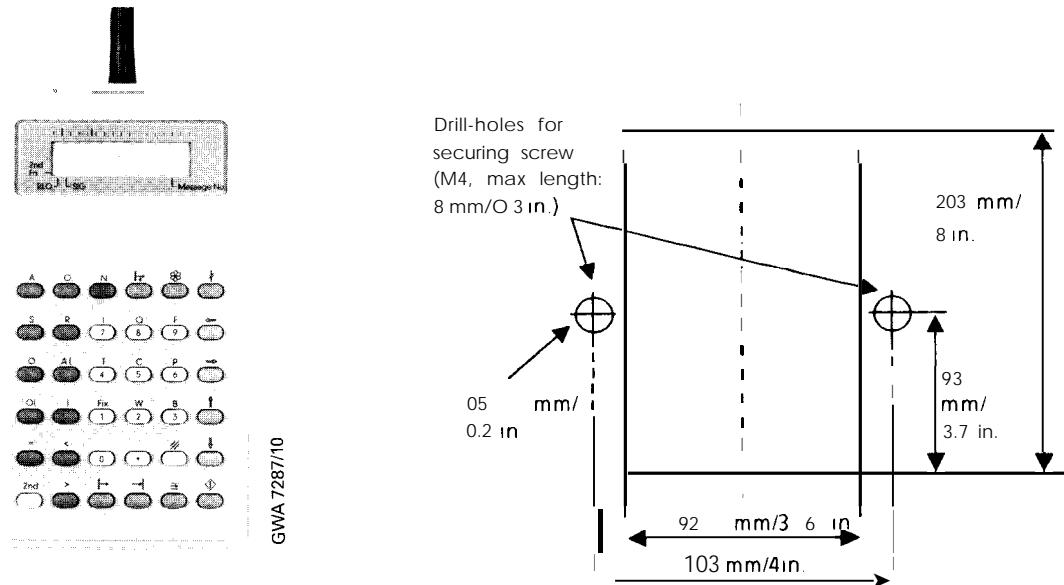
Cutout Dimensions for Mounting in a Control Panel
